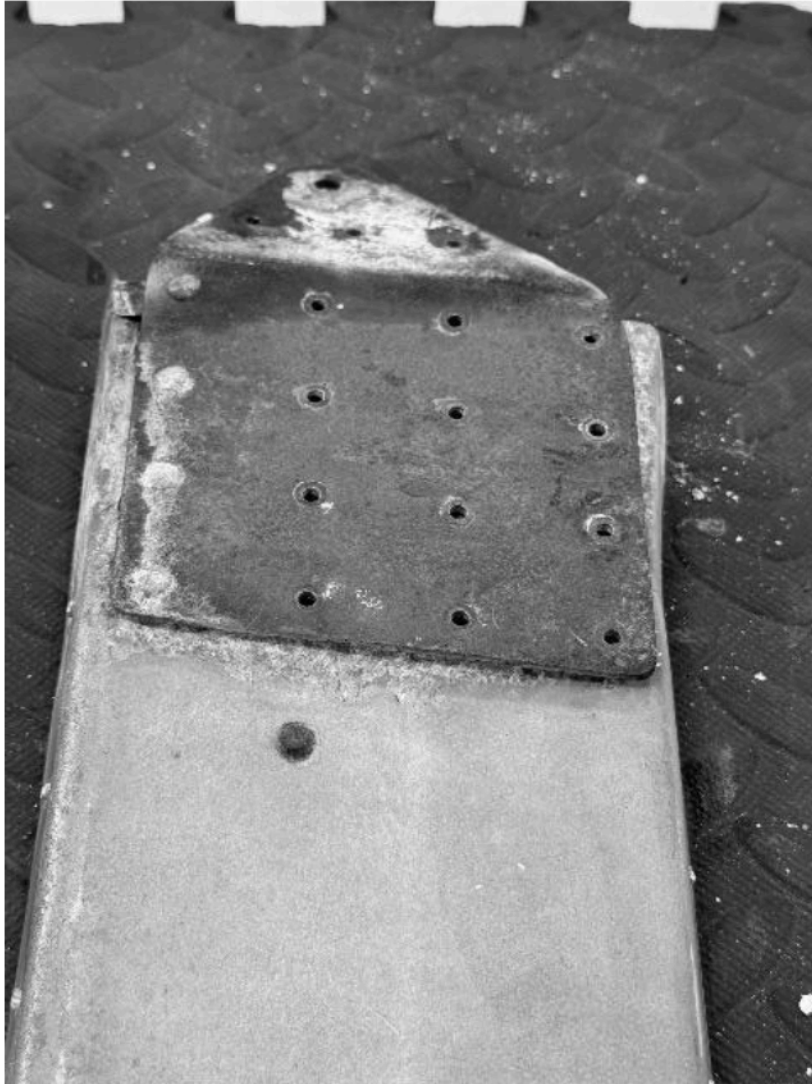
Forward Spar, Attachment Fitting, and Rivets with Corrosion from a PA-28-161.
